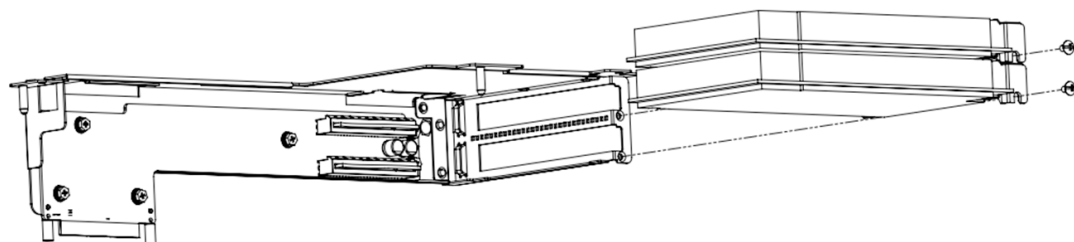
Assembly of FHHL Expansion Cards/ 安装全高半长扩充卡 / 安裝全高半長擴充卡
